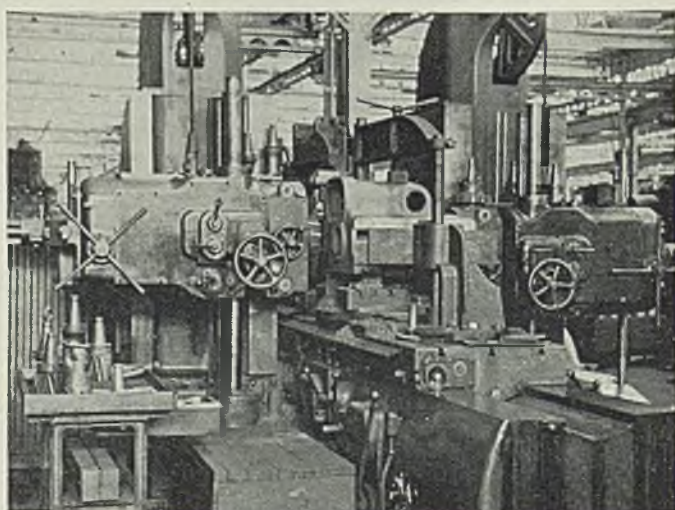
Simultaneous milling of both sides of spindle carrier housings on milling machines
